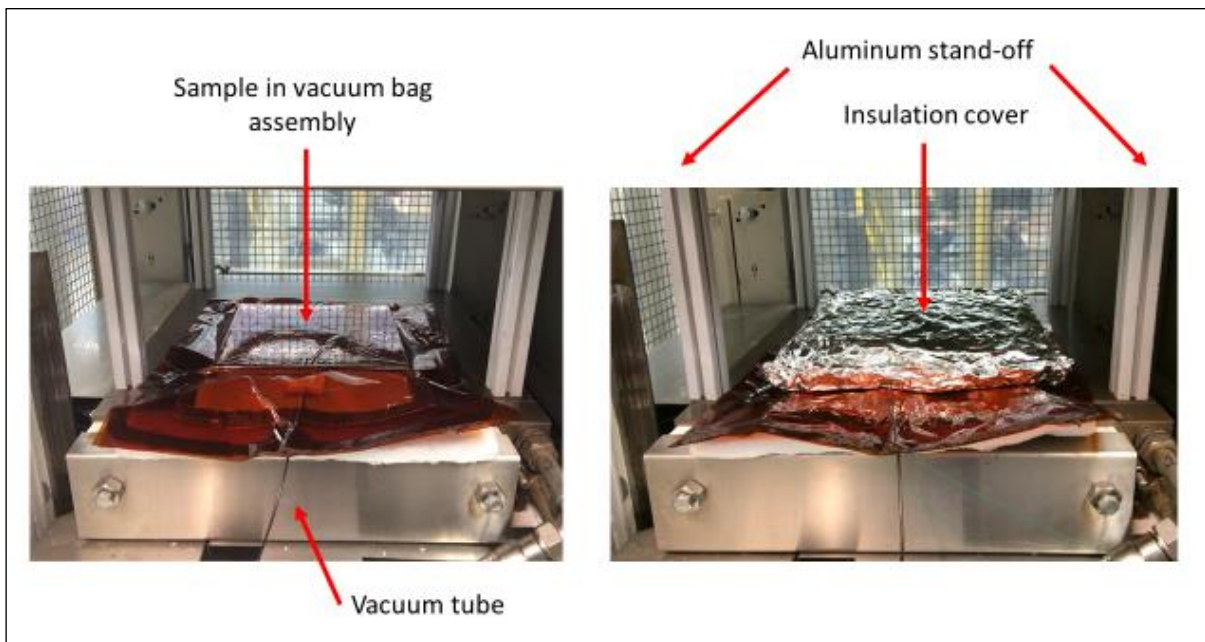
Lower platen vacuum bag assembly with and without insulation cover
